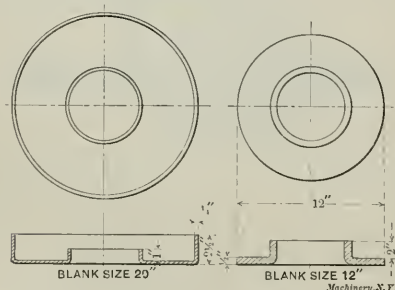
Samples of Work, Stamped Cold in the Machine shown above.
